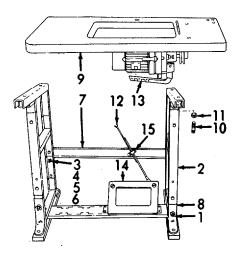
Clothing Sewing Machine Table, Assembly.
